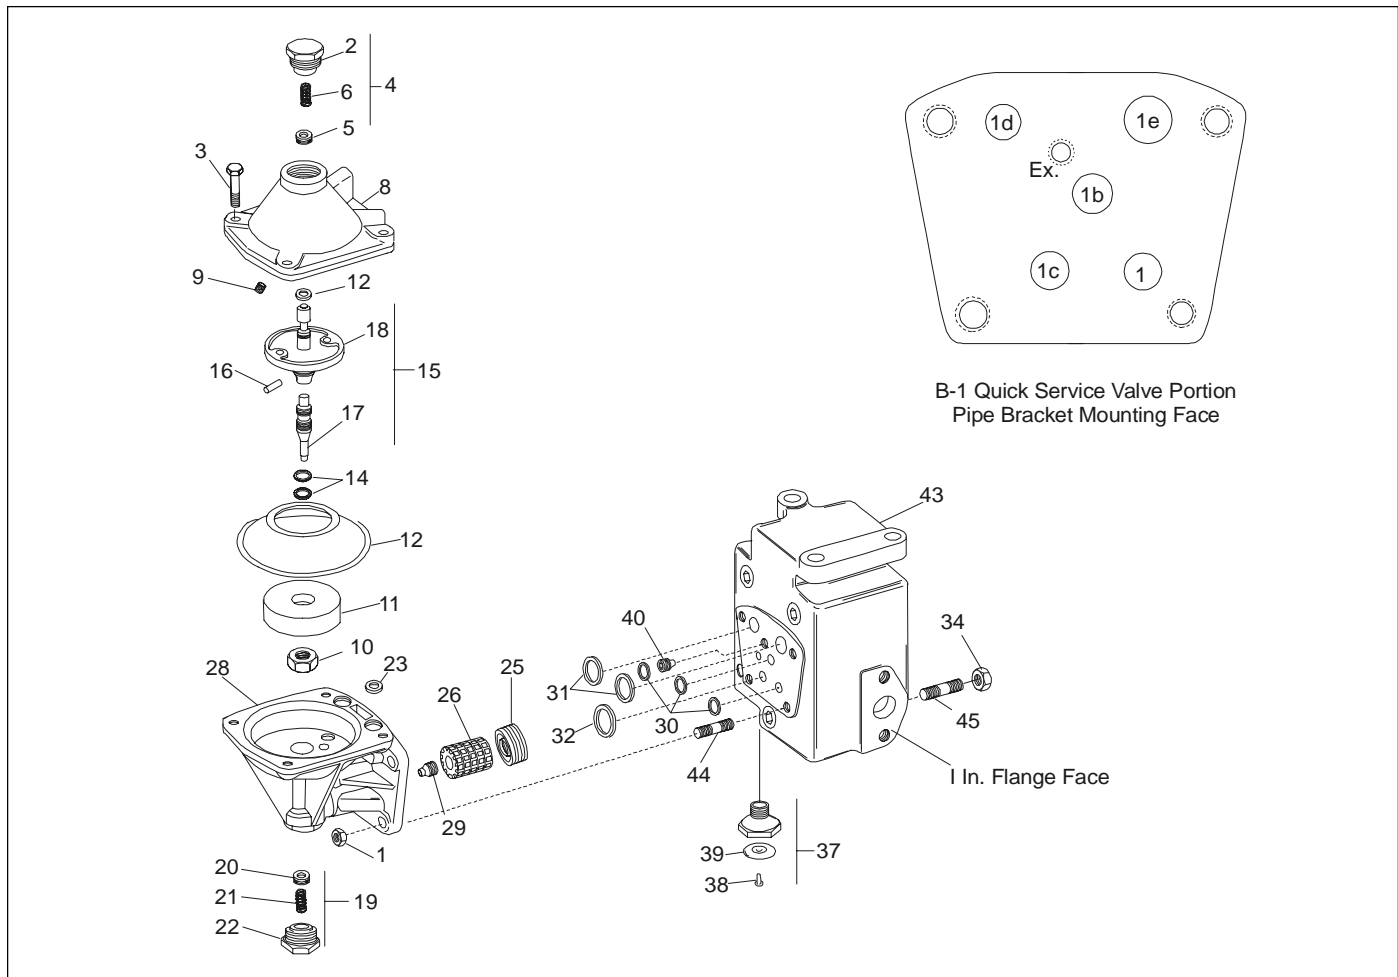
"B-1" Quick Service Valve Portion & Pipe Bracket Portion - Exploded View
